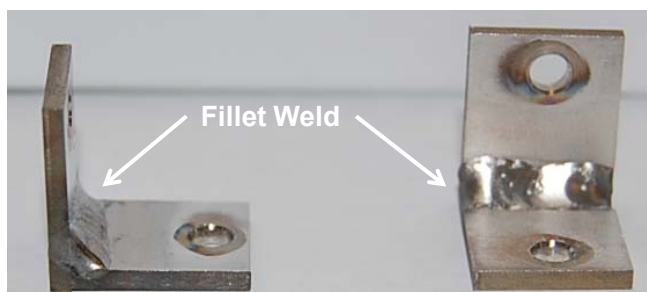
Two pieces of metals joined at a perpendicular angle with a fillet weld.
